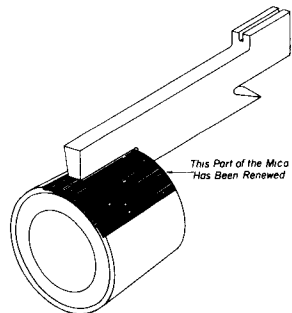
A quick repair that can be made if two bars are shorted.
